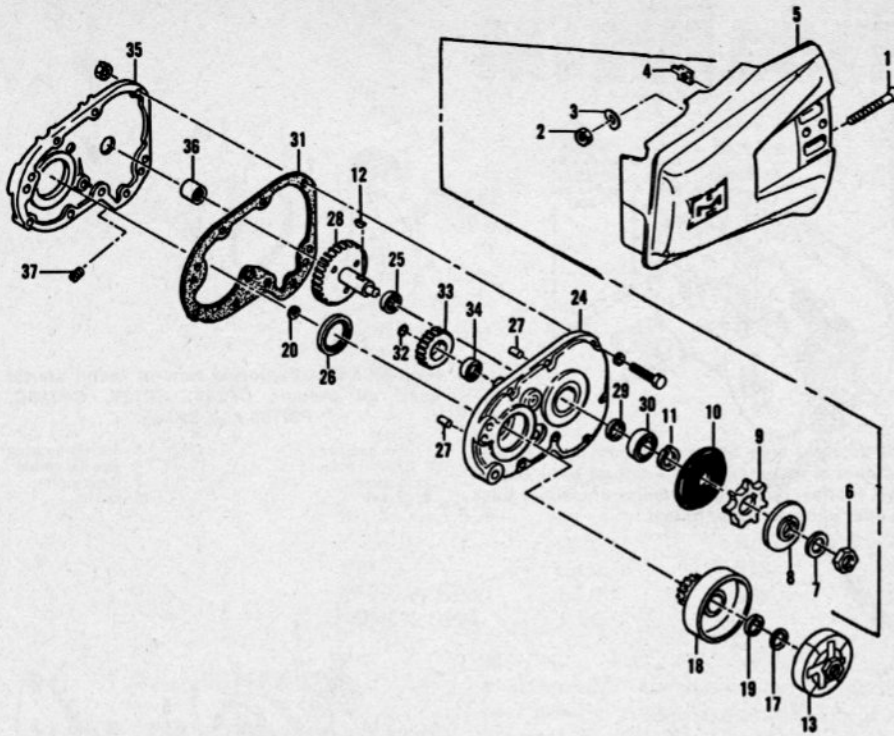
Exploded view of model 650 or 660 clutch guard and transmission. Input gear is on inner side of clutch drum (18).
